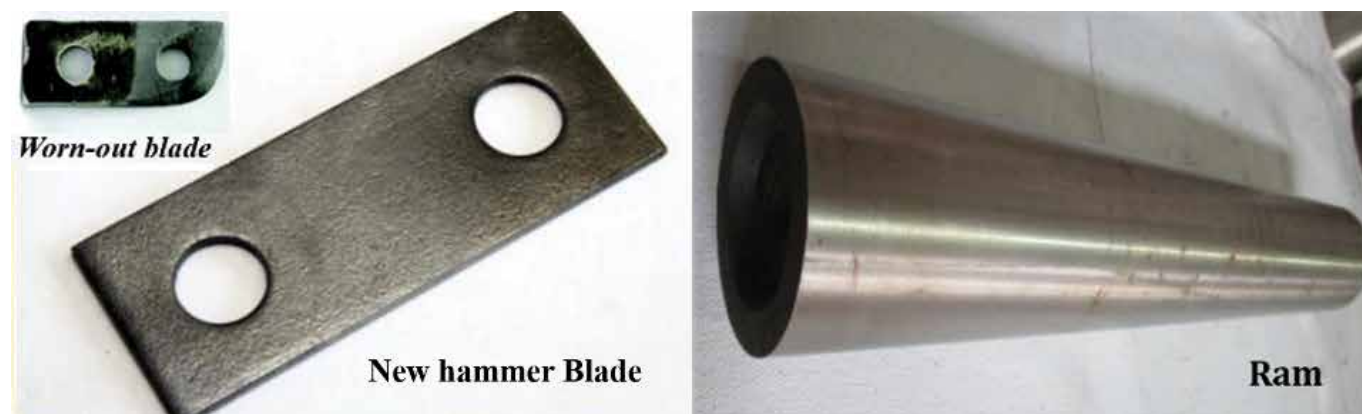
Photographs of hammer blade and ram used in briquetting machine
